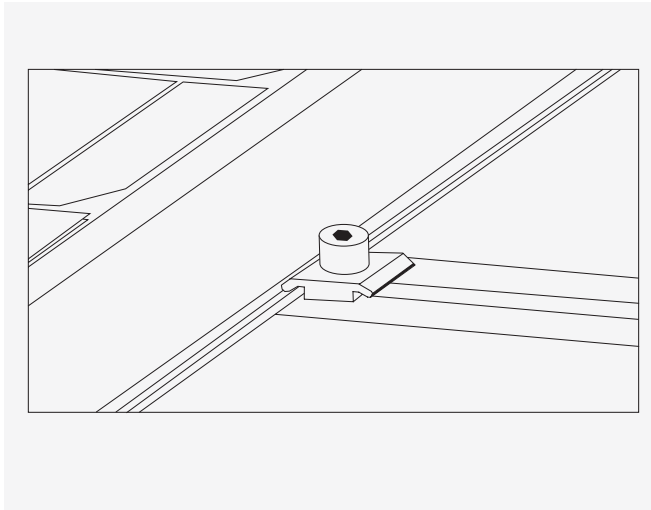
Additional mounting possibility of covered clamping on surrounding assembly groove
